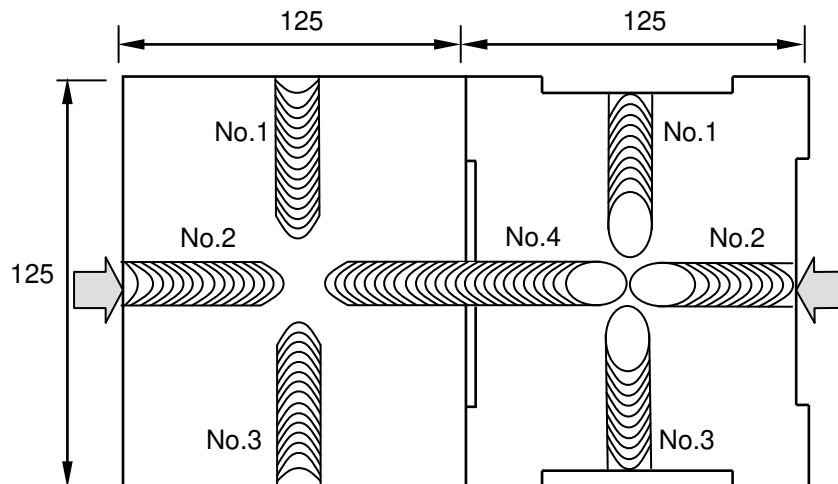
31 An illustration of the current G-BOP test block designed that allows four weld beads to be deposited on each test block (after Graville et al. 1995). Note: all dimensions in millimeters. [not to scale]
